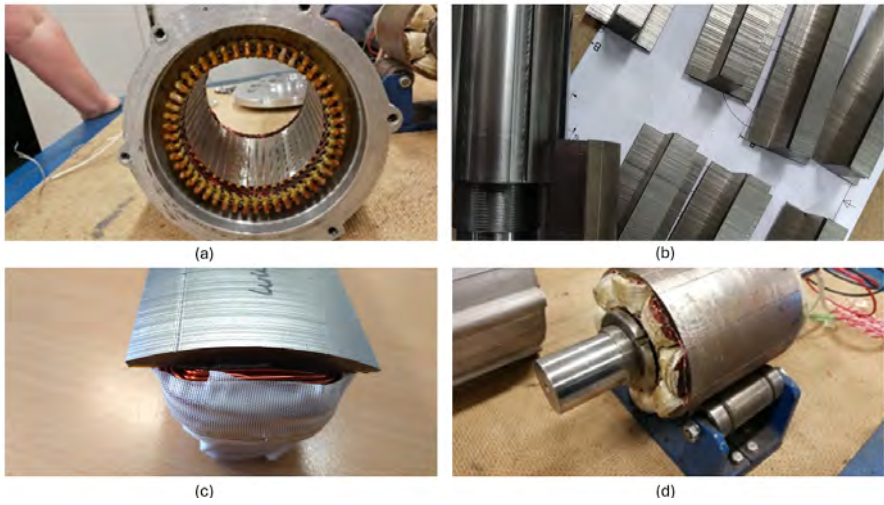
Manufacturing of the 60 kW EESM: (a) stator; (b) rotor lamination and shaft; (c) rotor pole; (d) rotor final assembly.
